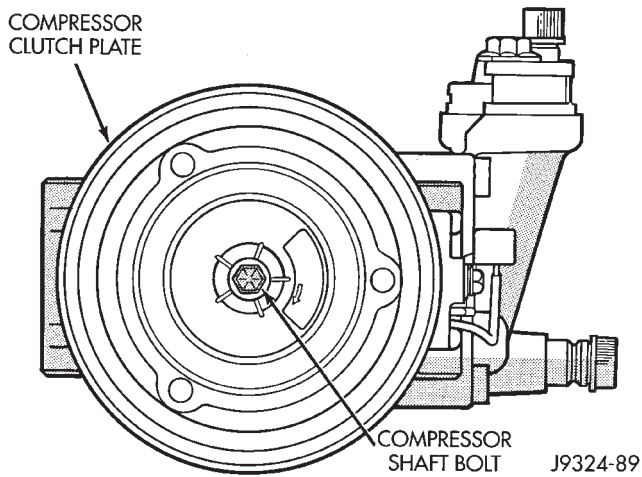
Compressor Shaft Bolt and Clutch Plate
